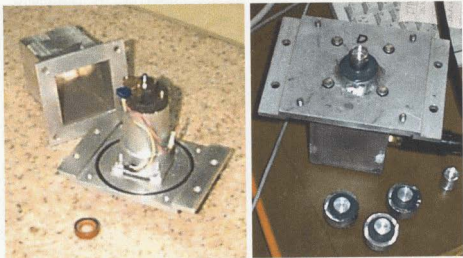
Mold for control surfaces – note dummy shaft in place to align fin shaft
